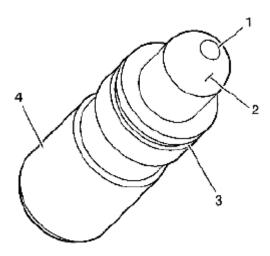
Inspecting Stationary Hydraulic Lash Adjuster Courtesy of SUZUKI OF AMERICA CORP.
